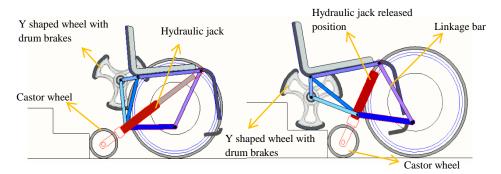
2d drawing of convertible wheelchair changing position for conventional use on flat surfaces and stair climbing position with the help of hydraulic jack
